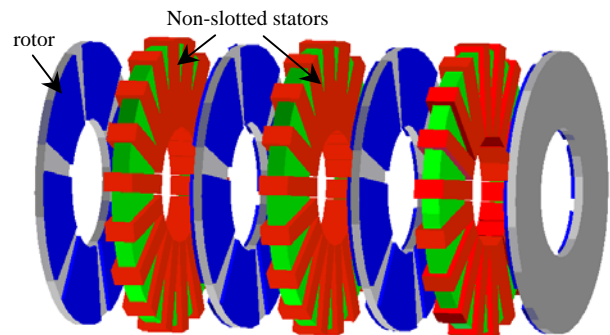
3D view of the slotless MULTI stage PM machine for N=3
